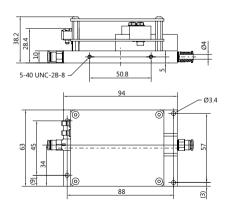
Outline drawing of DPD series driver with general purpose pad
